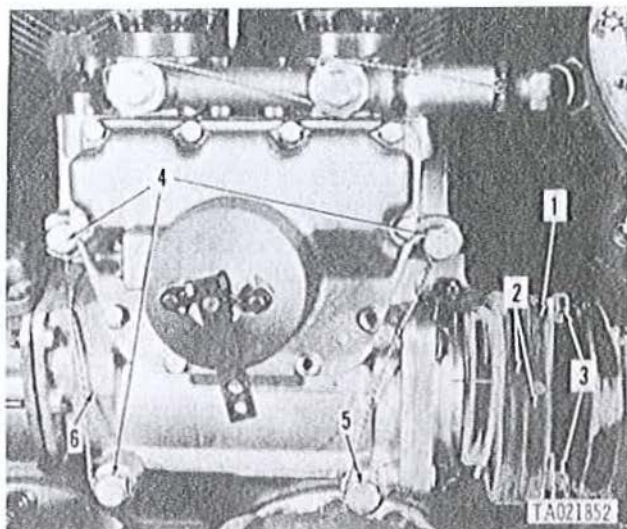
Removing or installing intermediate throttle lever support and throttle rods AVDS-1790-2DR engine.
